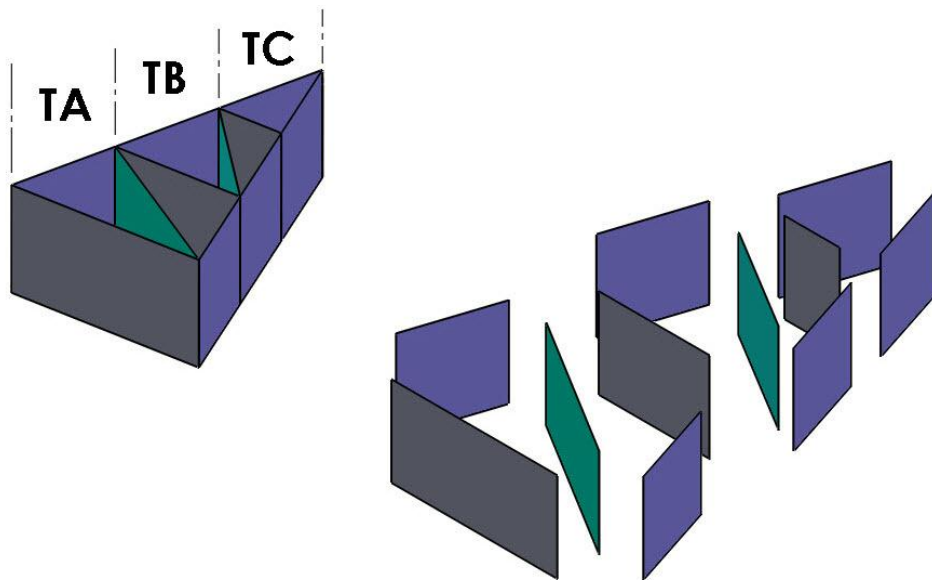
Shows the 11 planes needed to construct the sector's structure.
